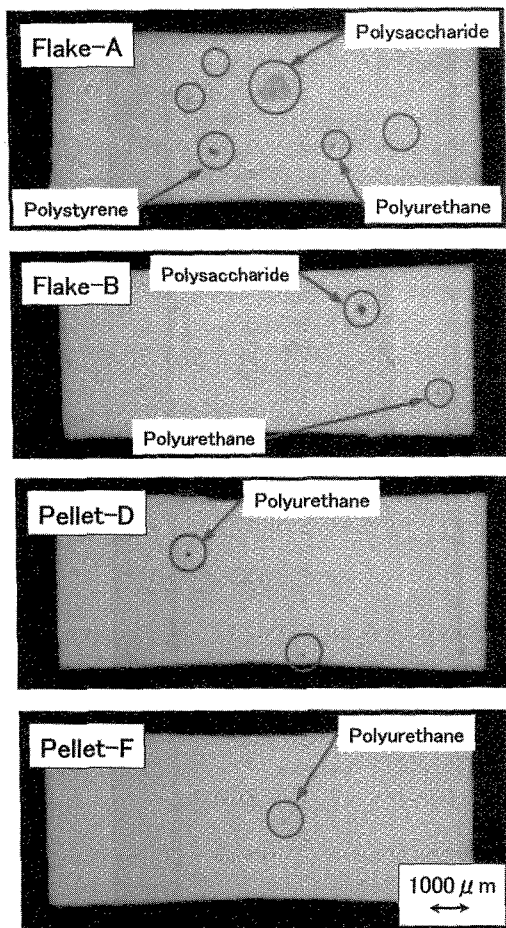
Photographs of the fracture surface of recycled PP – Flake-A, B, Pellet-D and F
